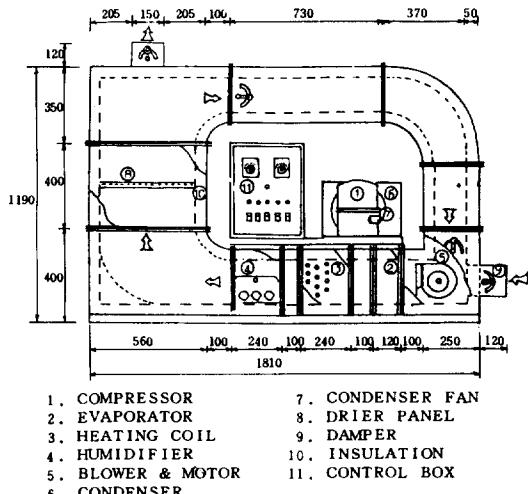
Schematic drawing and dimensions of dryer used for experiment.
